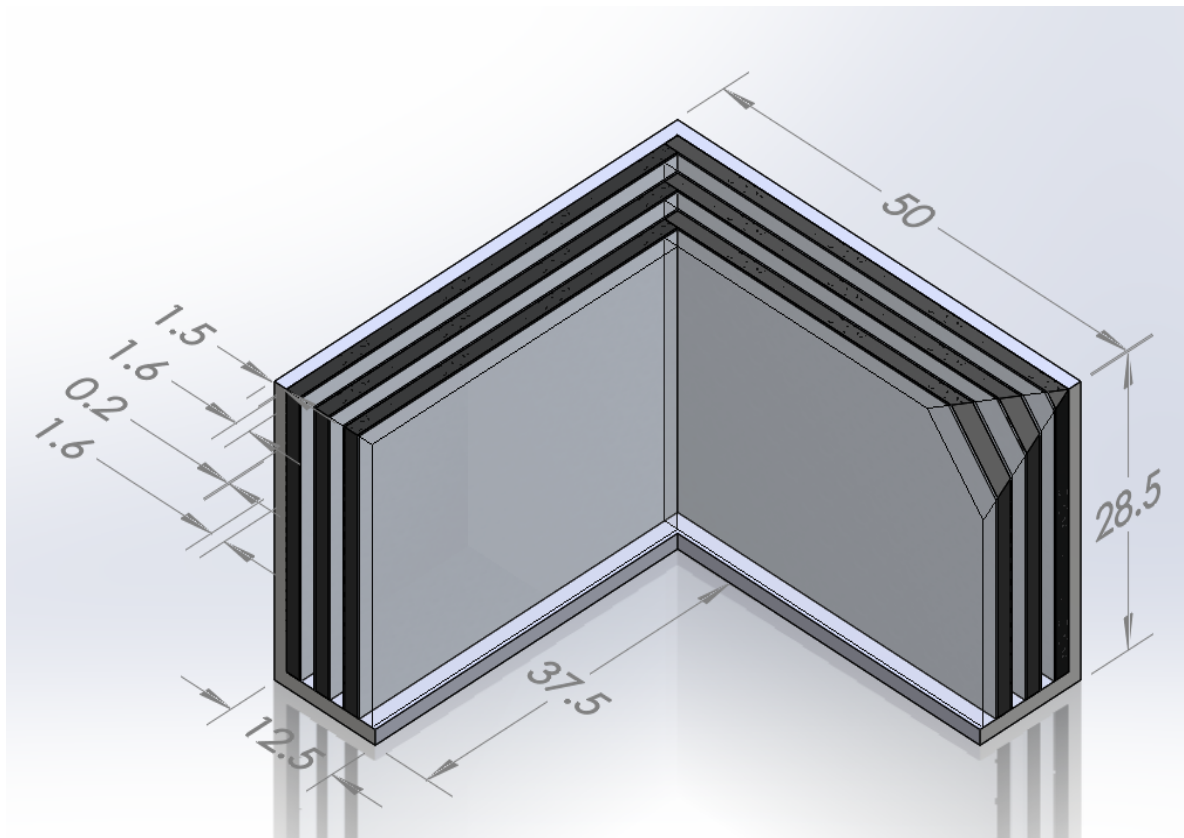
View of proposed corner damper with stacked layer configuration, with dimensions in millimeters. On the upper right corner, there is a triangular section removed so that the layers can be better visualized.
